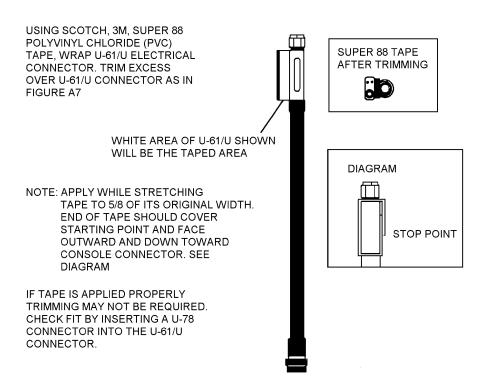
Regulator to Survival Kit Hose Assembly Taping
